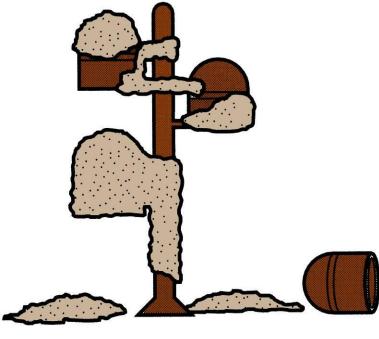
Steps in investment casting: (5) the mold is held in an inverted position and heated to melt the wax and permit it to drip out of the cavity, (6) the mold is preheated to a high temperature, the molten metal is poured, and it solidifies
